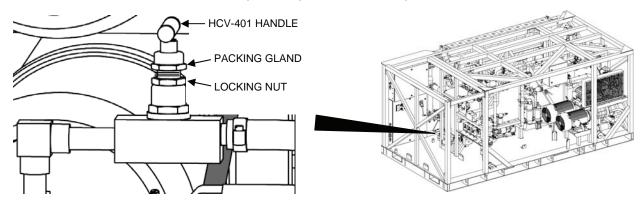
Main Pressure Control Valve HCV-401 Calibration.
